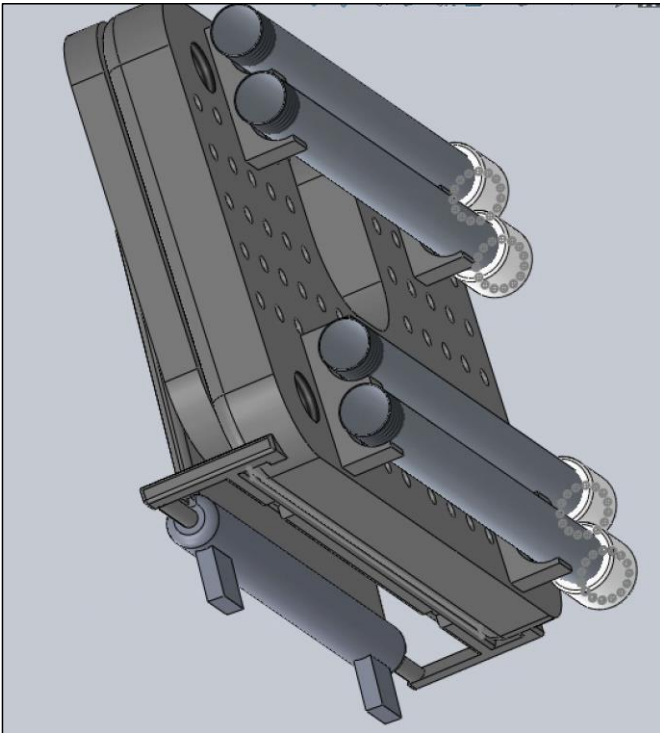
Illustrating the Isometric View of the Prototype in the Deployed State
